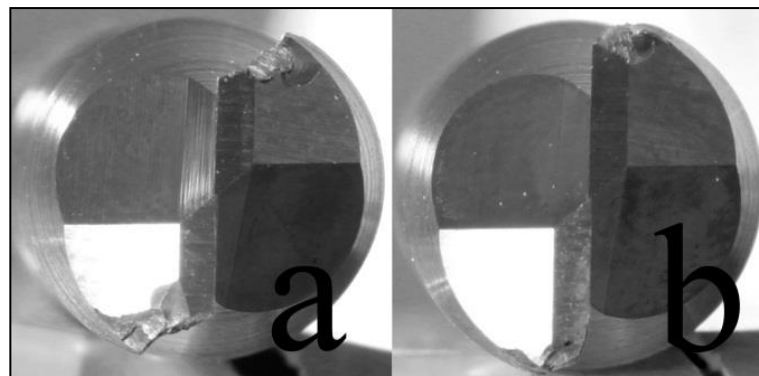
Pictorial view of the uncoated solid carbide cutting tools used in the first machining trial after machining under a) dry and b) cryogenic conditions
